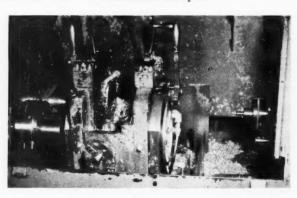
Station 2 of Heald Double End Bore-Matic is shown at right.
